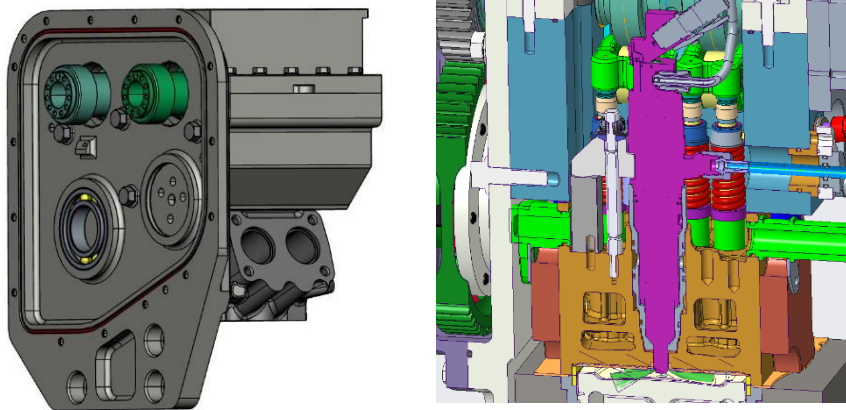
Titan overhead assembly (left) and Cylinder head cross section
